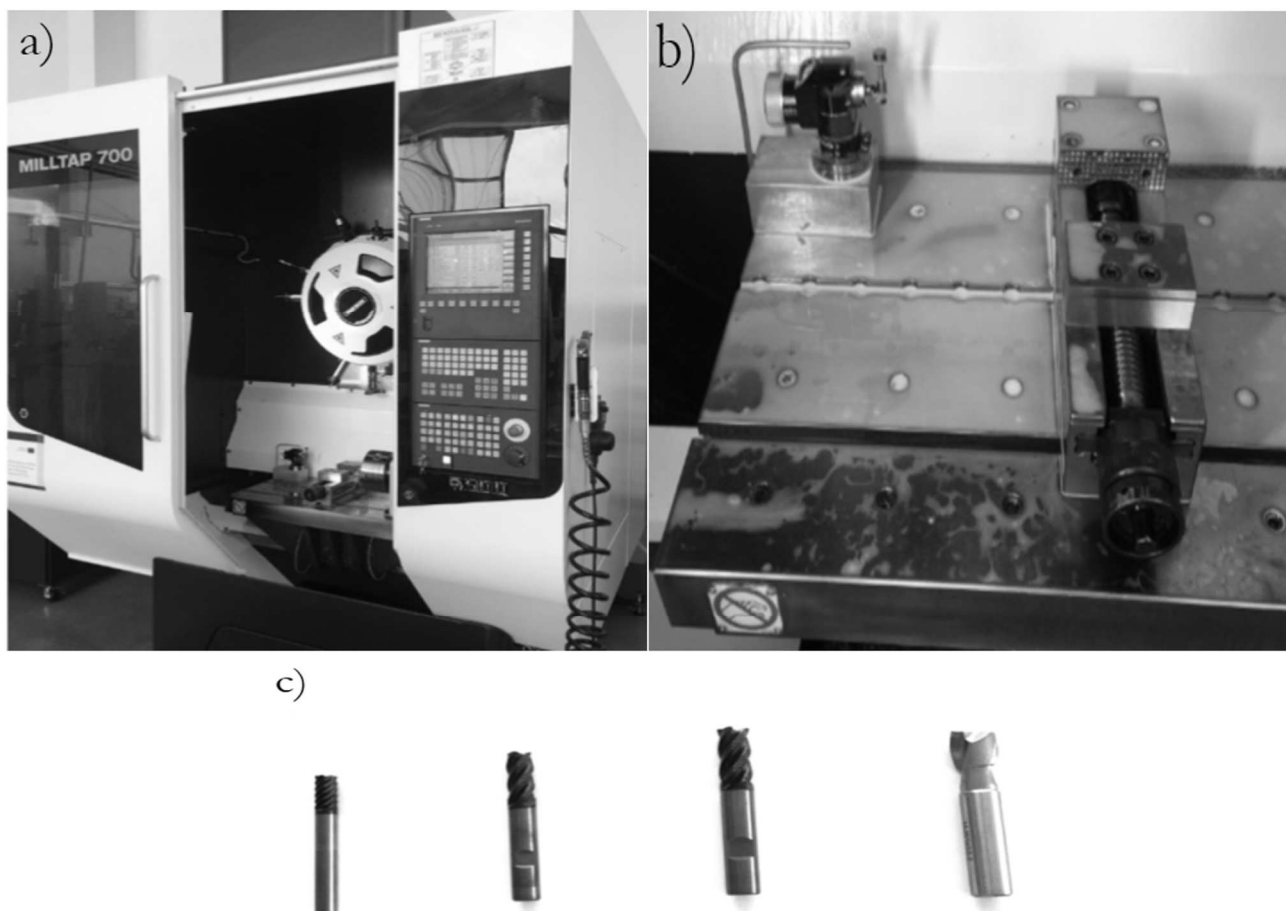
Highlights MILLTAP 700 four-axis machining centre: a) general view, b) tool probe arrangement in the working space of the machine tool, c) machining tools
